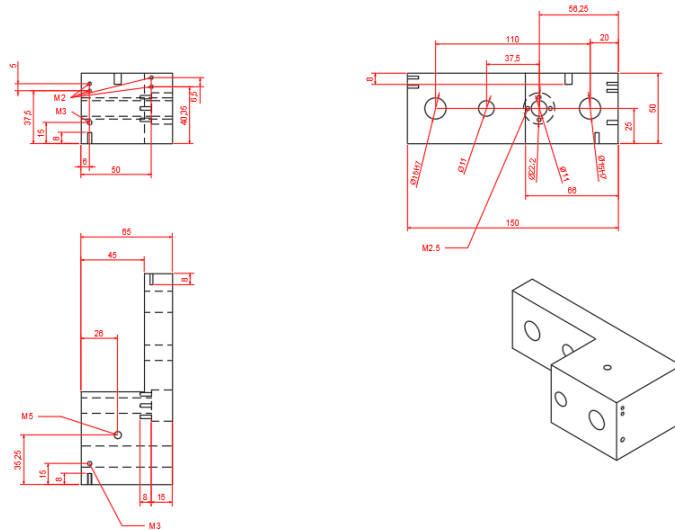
Mechanical drawings of the of the components 1, 2 and 3.
